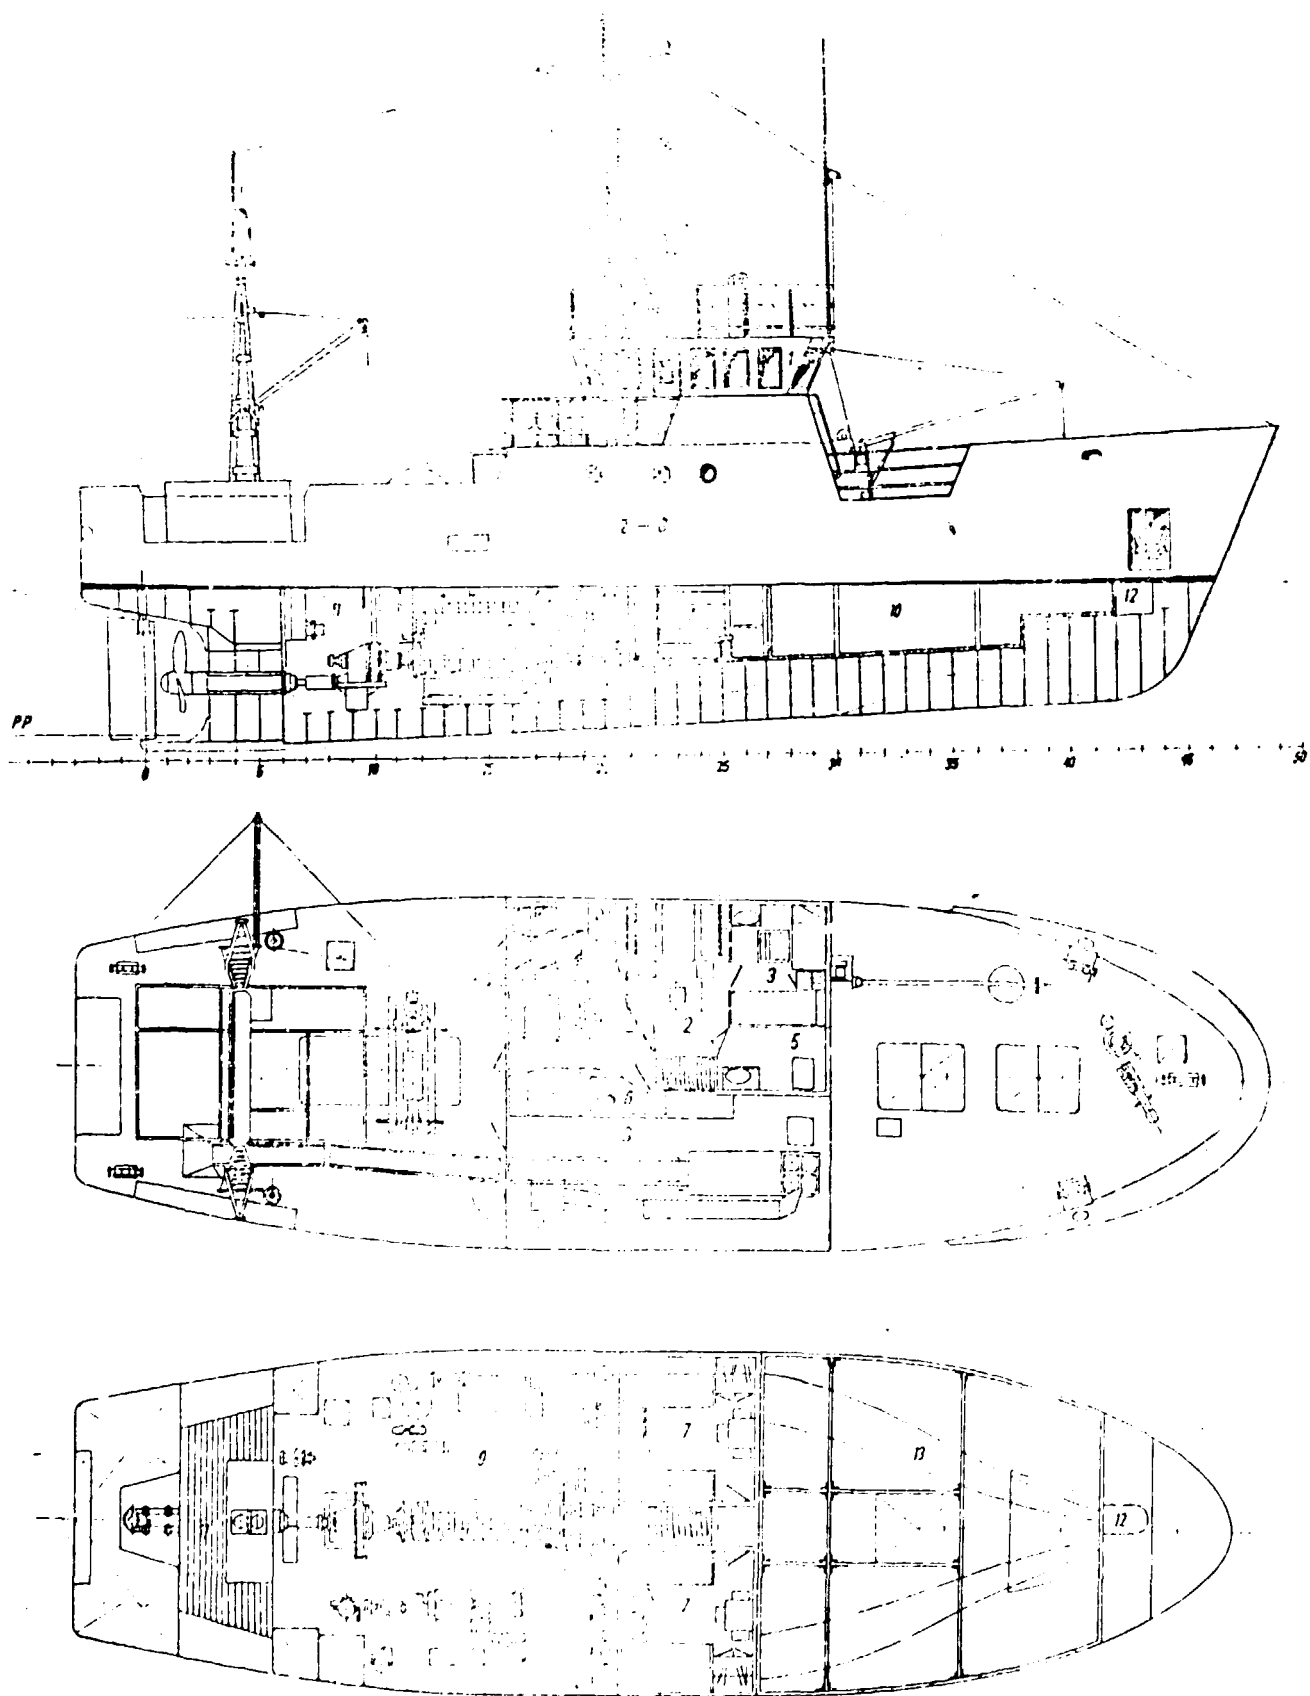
GENERAL ARRANGEMENT PLAN OF FISHING TRAWLER B-412.
